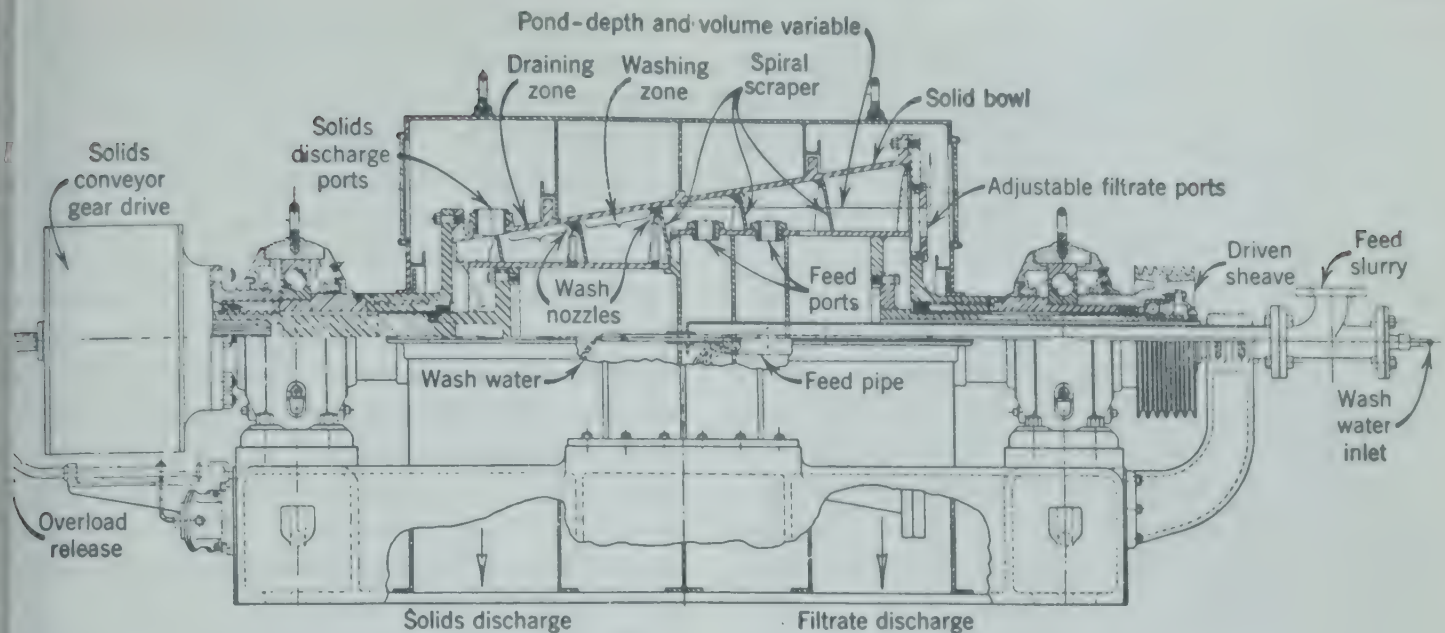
Continuous horizontal solid-bowl centrifugal with spiral scraper. (Bird Machine Co.)
